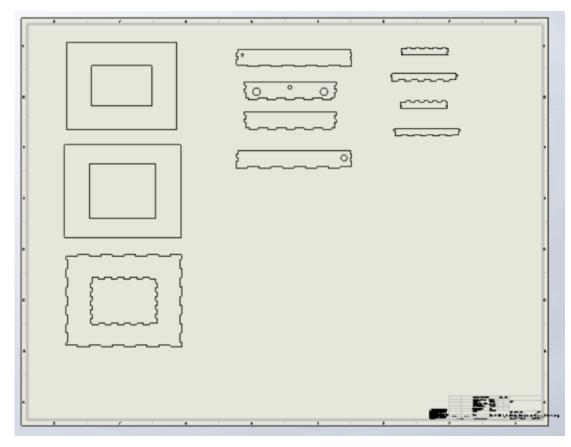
SOLIDWORKS drawing ready to be cut by the laser cutter with acrylic.
